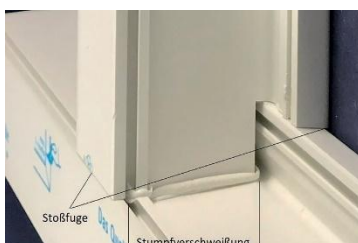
Butt-welded mullion, rebate seal (AD) Figure 25 b: Butt-welded mullion center seal (MD)
